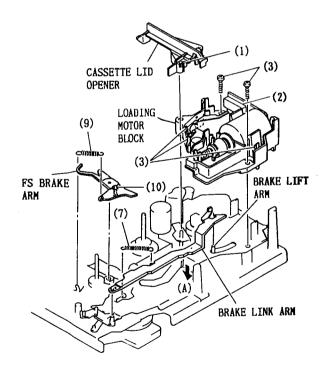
Loading Motor Block, Brake Link Arm FS Brake Arm
